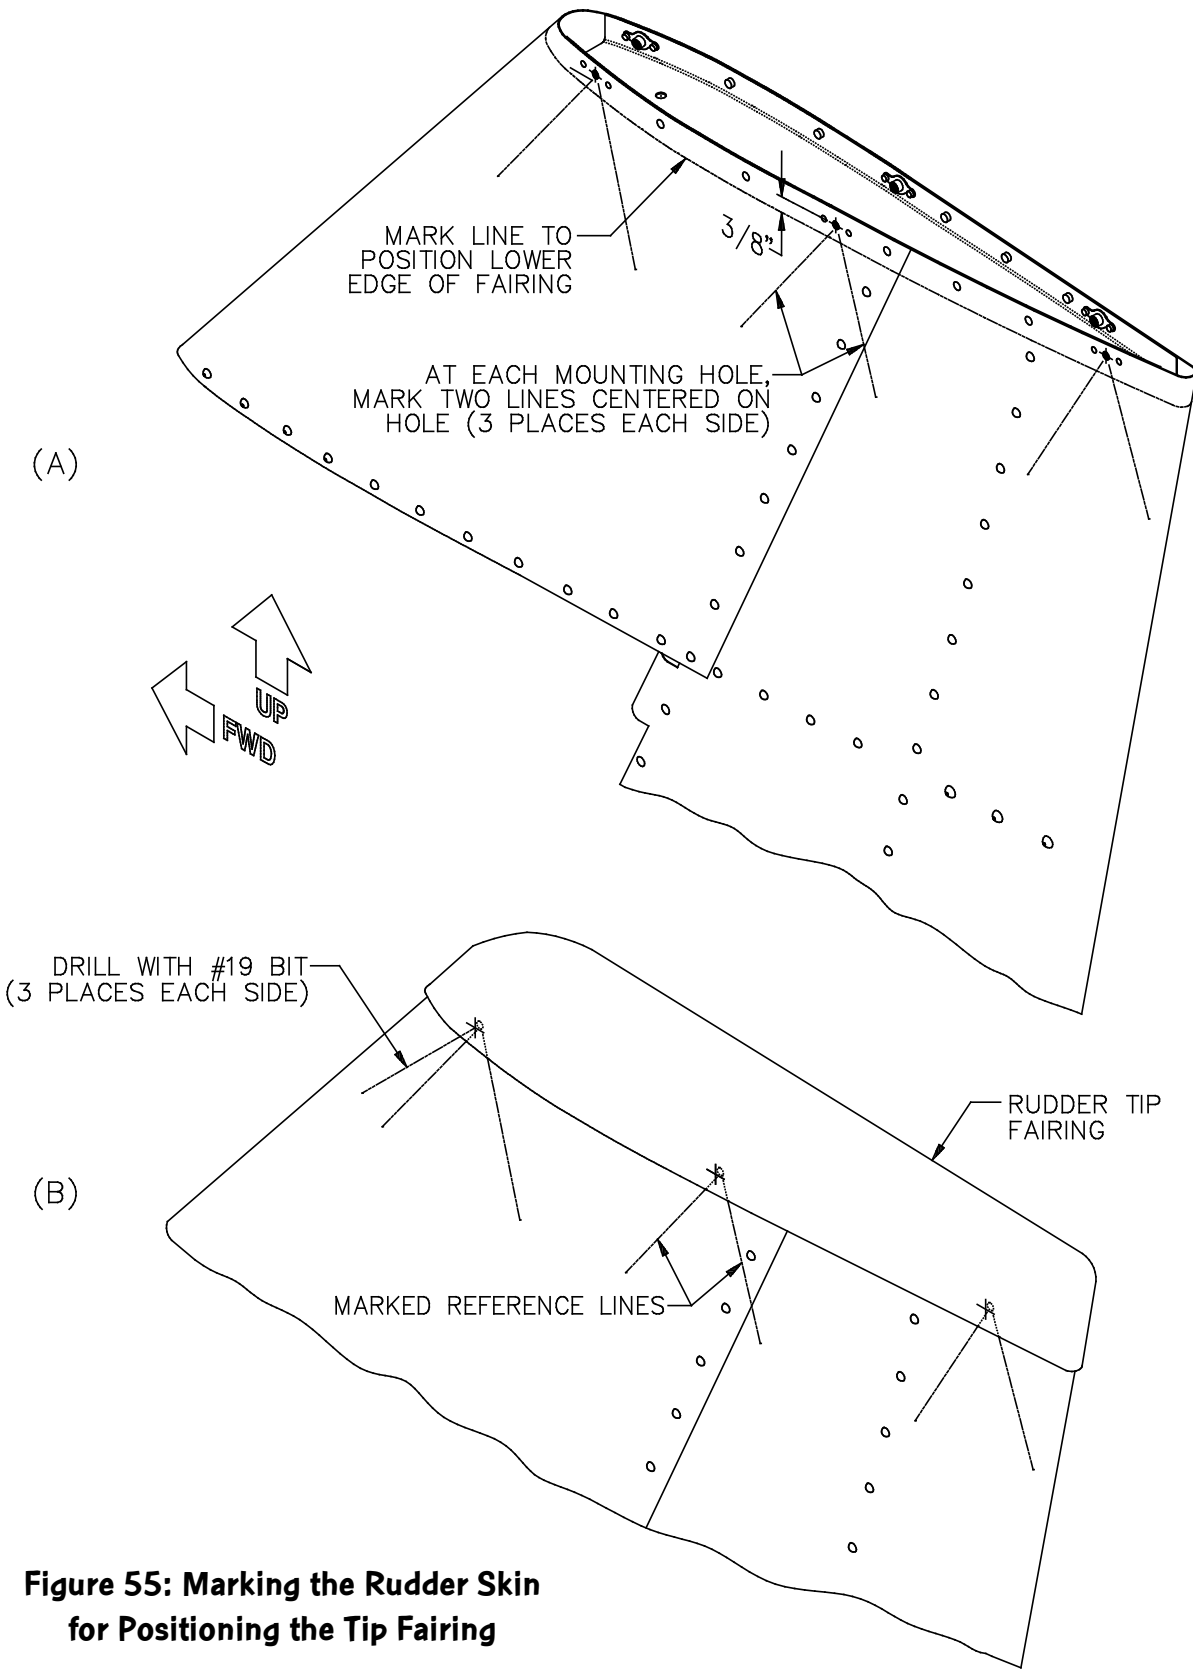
Marking the Rudder Skin for Positioning the Tip Fairing
